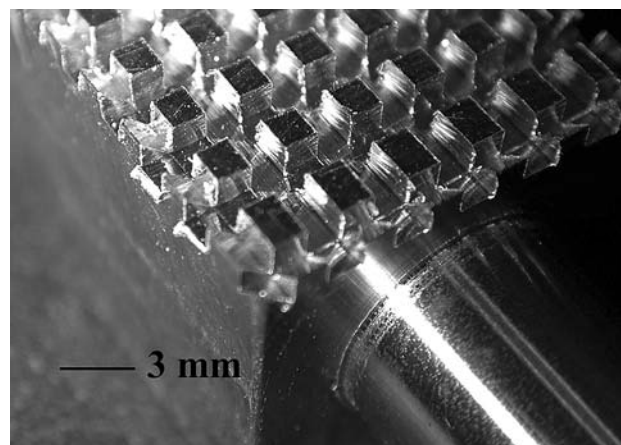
Surface pattern machined into CuCrZr alloy substrates for 5 mm thick coating
